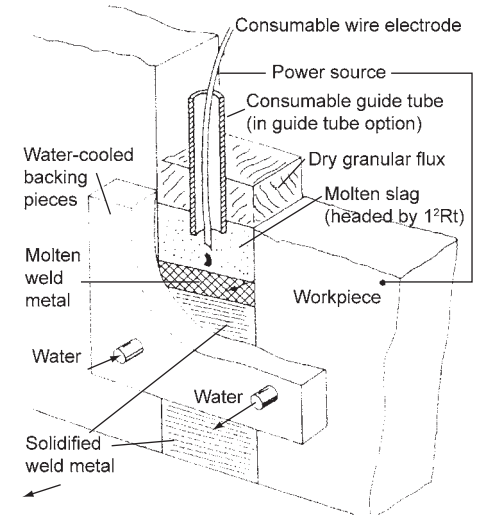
Schematic illustration of the electroslag welding process used for heavy deposition welding in position or in a vertical plane using special tooling (as shown). Source: Ref 2
